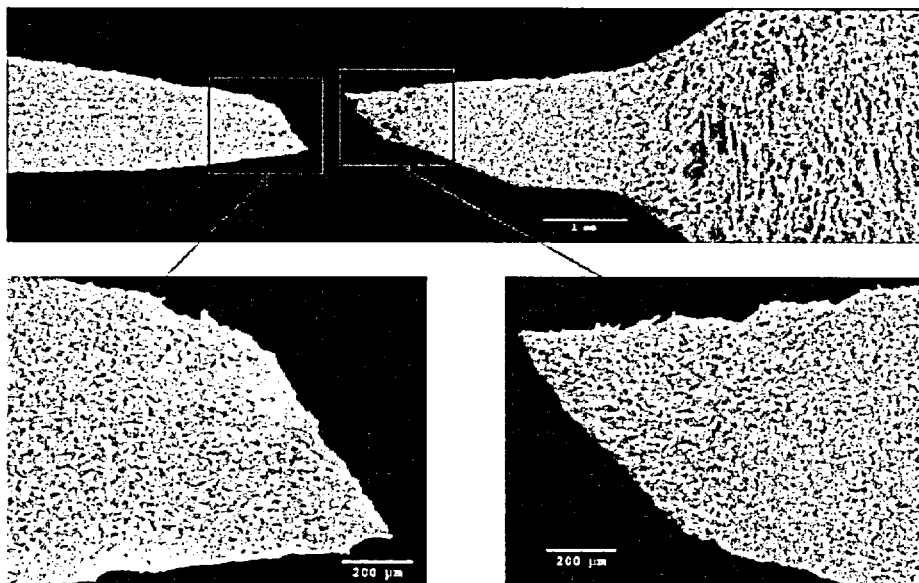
Metallographic cross section of tear #6-2. This sample contained a single repair weld. Grinding on the outside surface ended fairly abruptly at the edge of the back-up bar, resulting in a fairly deep but narrow region of liner thinning. Tearing occurred in the heat affected zone adjacent to the weld, and was accompanied by substantial localized plastic deformation.
